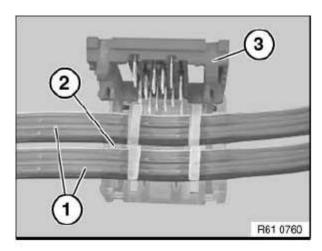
Identifying Ribbon Cables And Connector Housing Courtesy of BMW OF NORTH AMERICA, INC.
